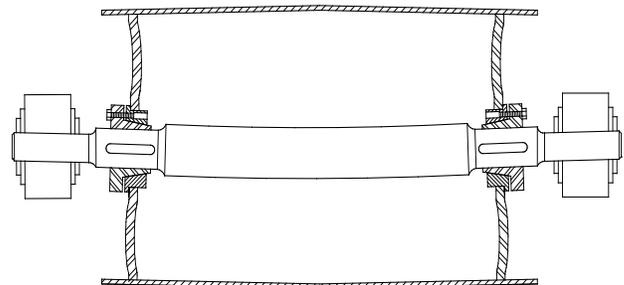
Sketch illustrating how shaft deflection, created by belt tensions, causes the pulley end discs to deflect.
